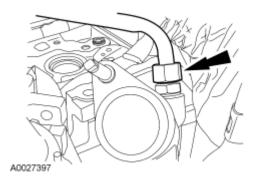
EGR Tube Nut At EGR Courtesy of FORD MOTOR CO.
